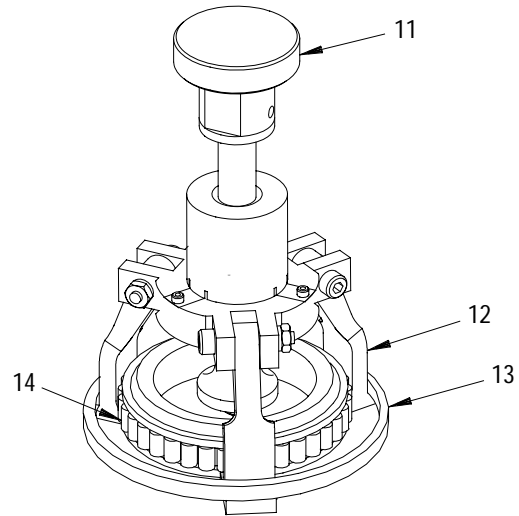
No. 5 Bearing Inner Race and Rollers - Removal From No. 5 Bearing Inner Support Assembly (Sheet 2 of 3)
